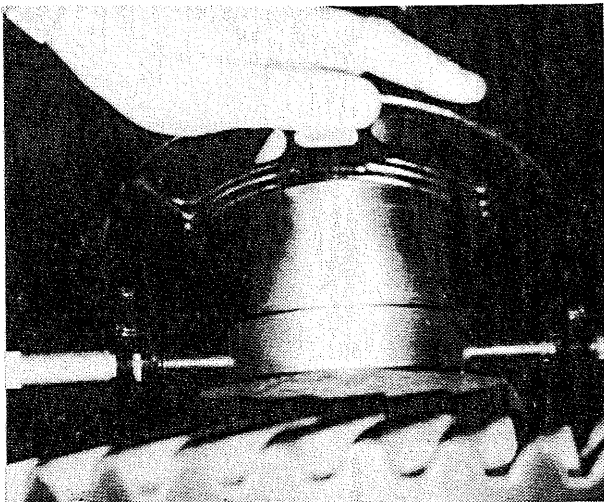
Ring Gear, Pinion & Drum Shaft (1 of 5)
